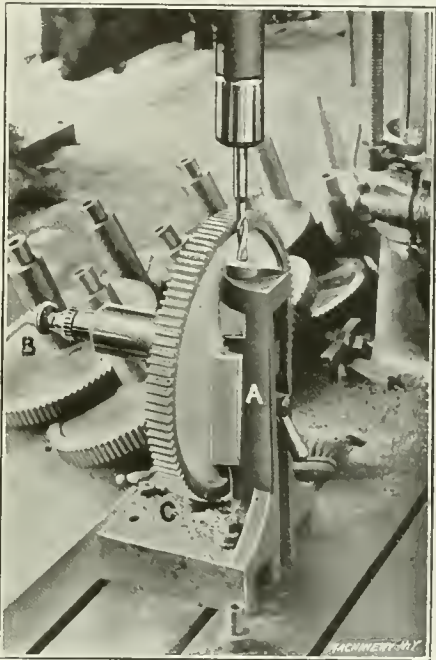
Jig for Drilling and Reaming the Hole for the Stroke-adjusting Screw in the Bull-gear
